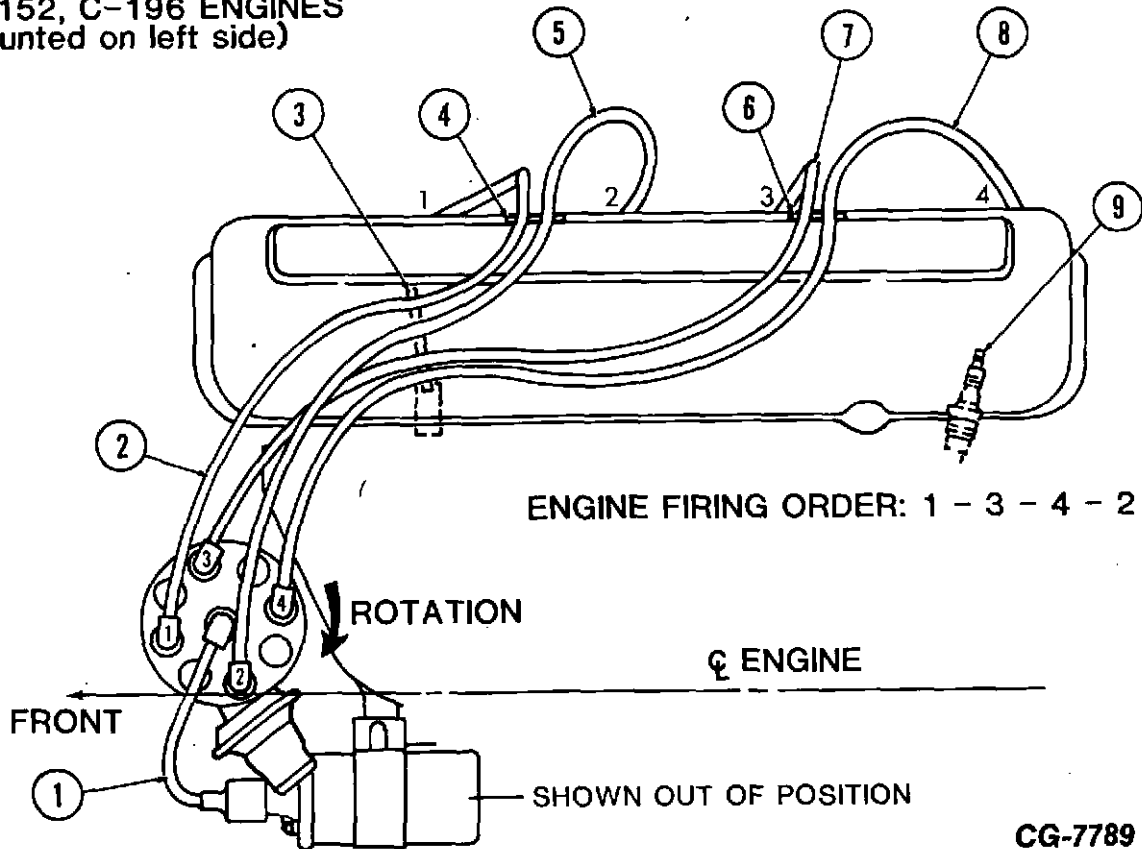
SPARK PLUG CABLE ROUTING FOR C-152, C-196 ENGINES
